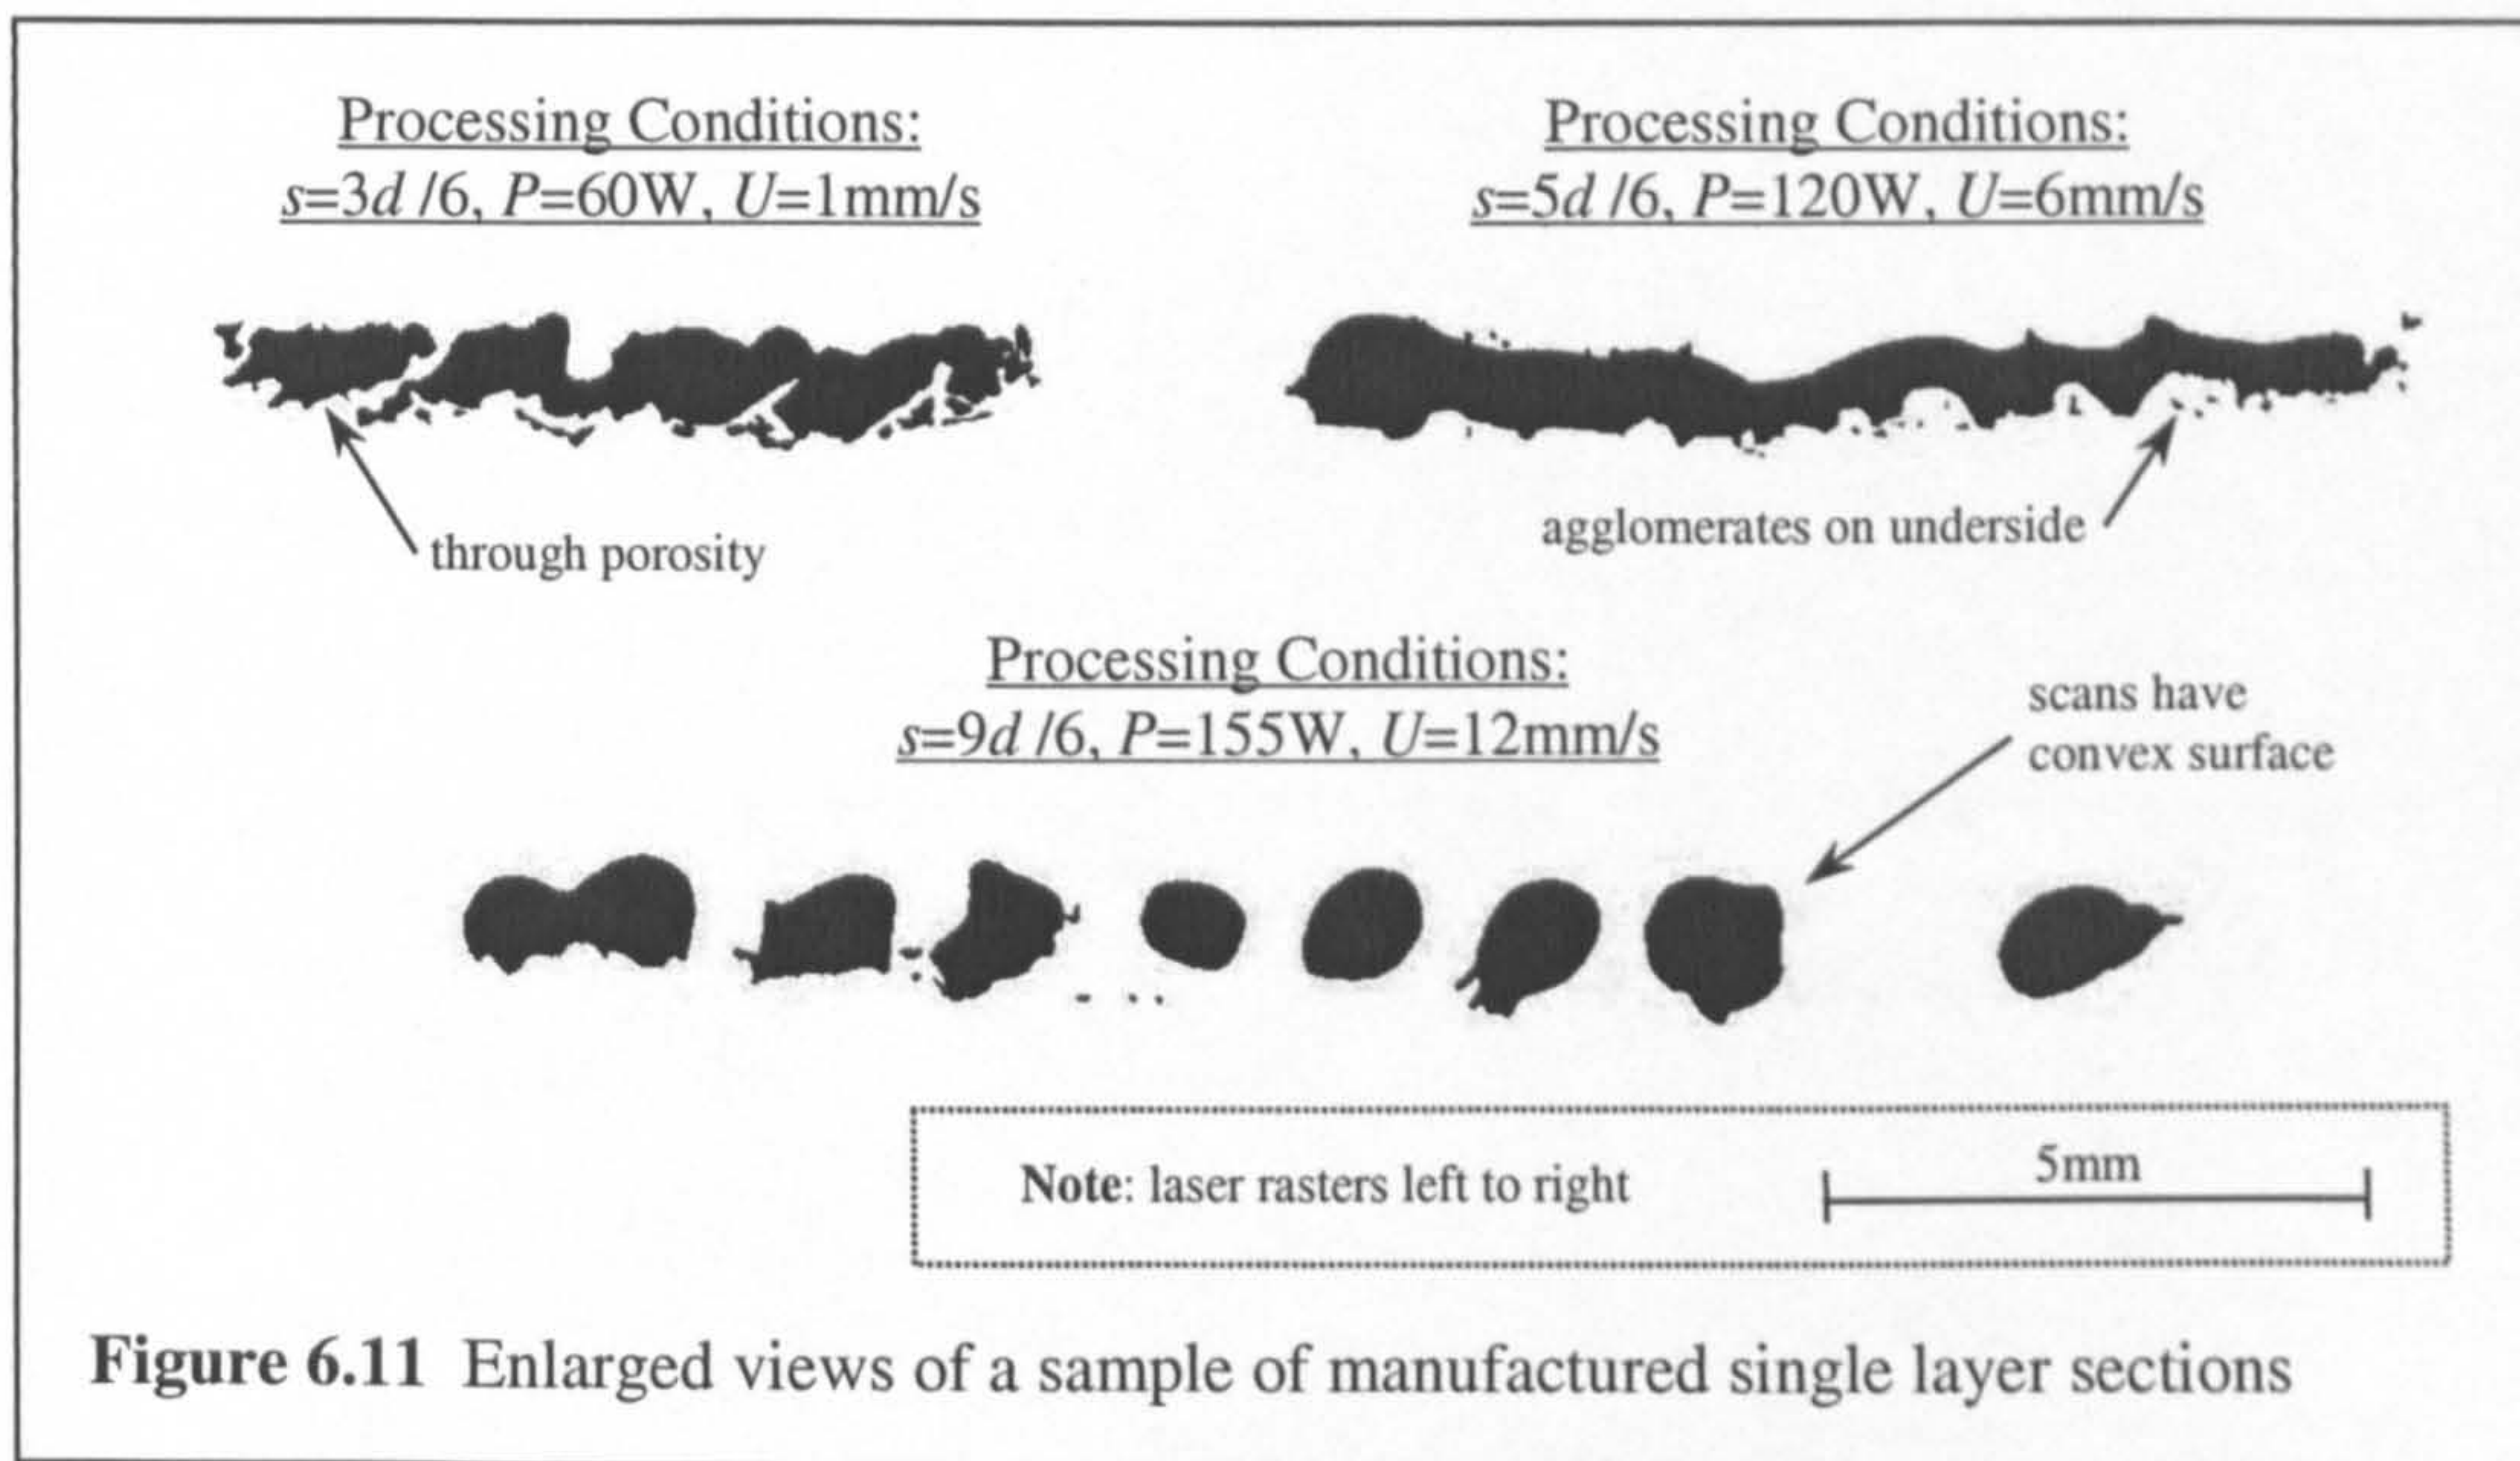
Enlarged views of a sample of manufactured single layer sections
